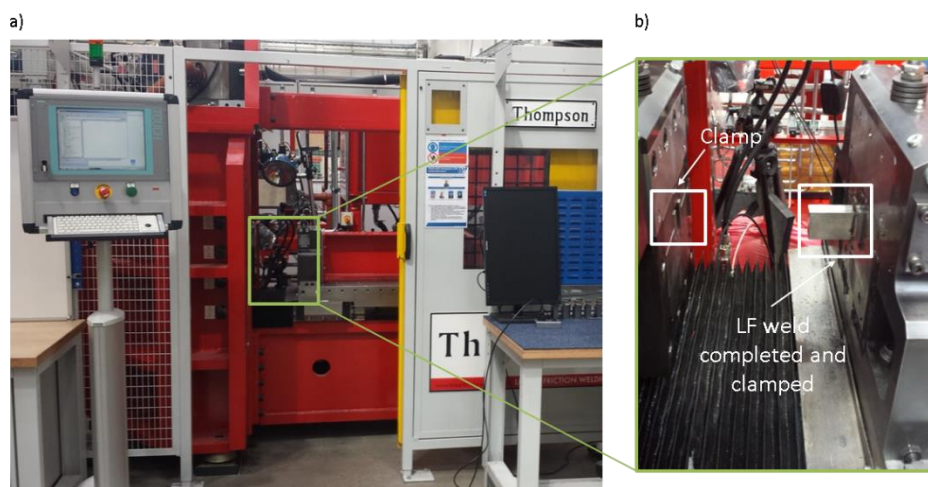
a) Thompson E20 LFW machine used at TWI and b) zoom on a linear friction weld completed
